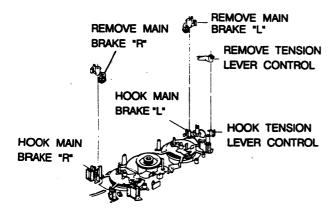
Main Brake L/R and Tension Lever Control Removal
